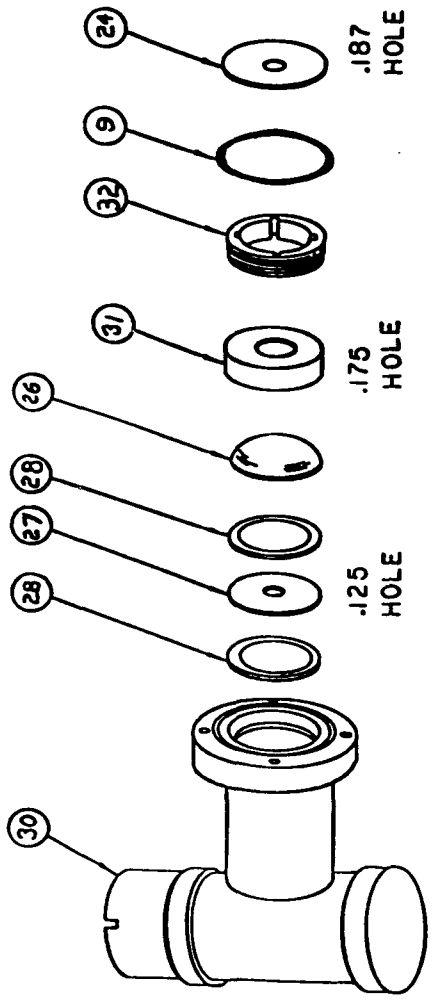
Part 2 (of 3). Light-scattering chamber assembly schematic.
